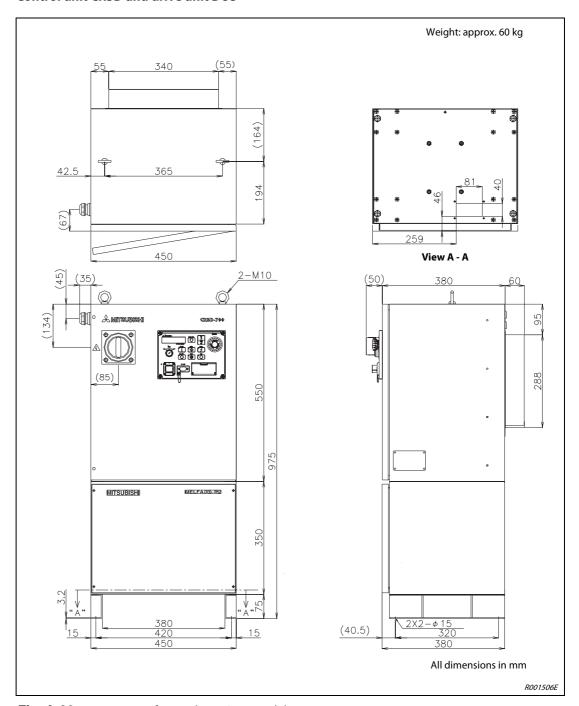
Dimensions of control unit CR3D and drive unit DU3
